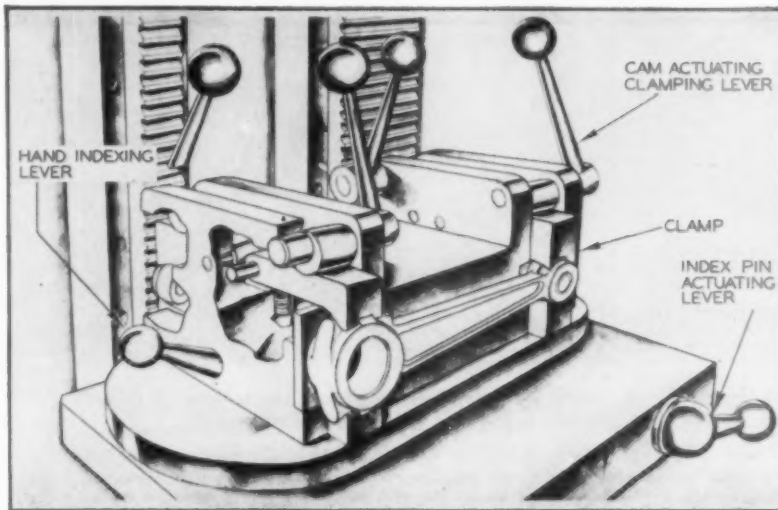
, an index holding fixture for broaching thrust faces on connecting rods. The operator unloads and loads one station while the opposite is in broaching position.
